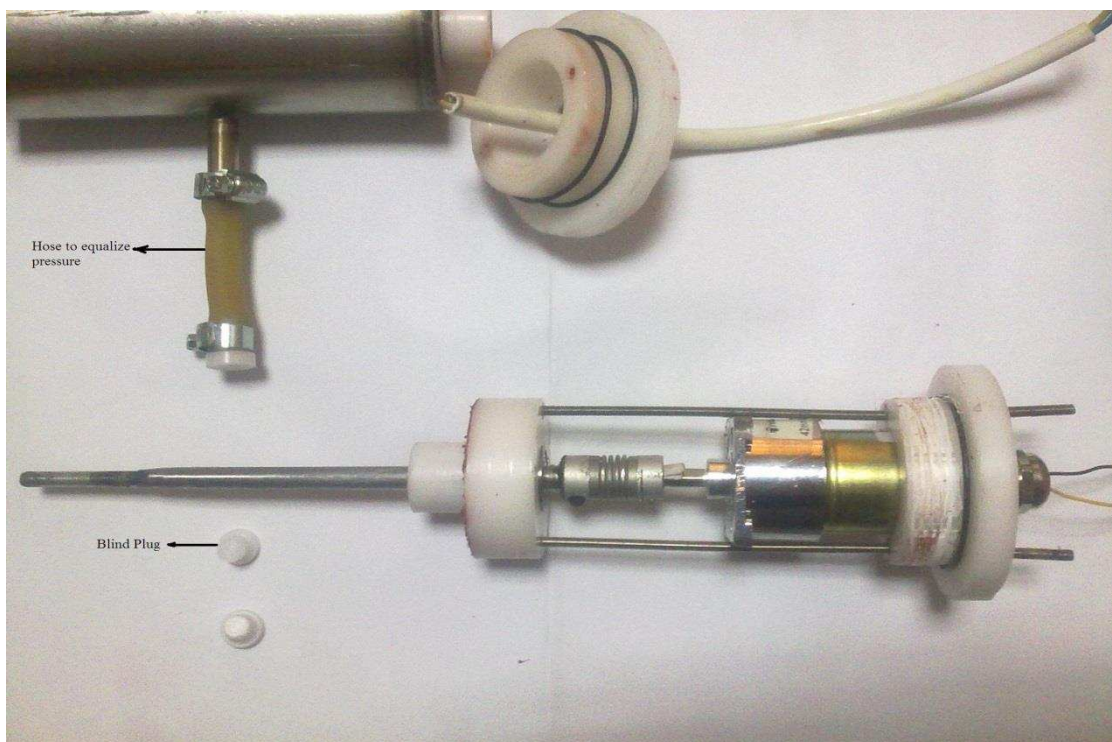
Hose, Blind Plug and Motor, Coupling and Shaft Assembly
